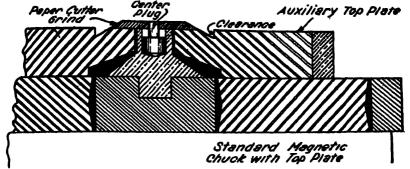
TYPICAL ARRANGEMENT FOR HANDLING THIN WORK
